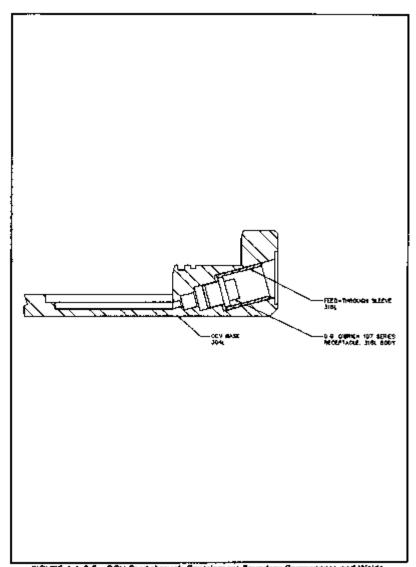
,2-5. OCV Feed-through Containment Boundary Components and Welds.
